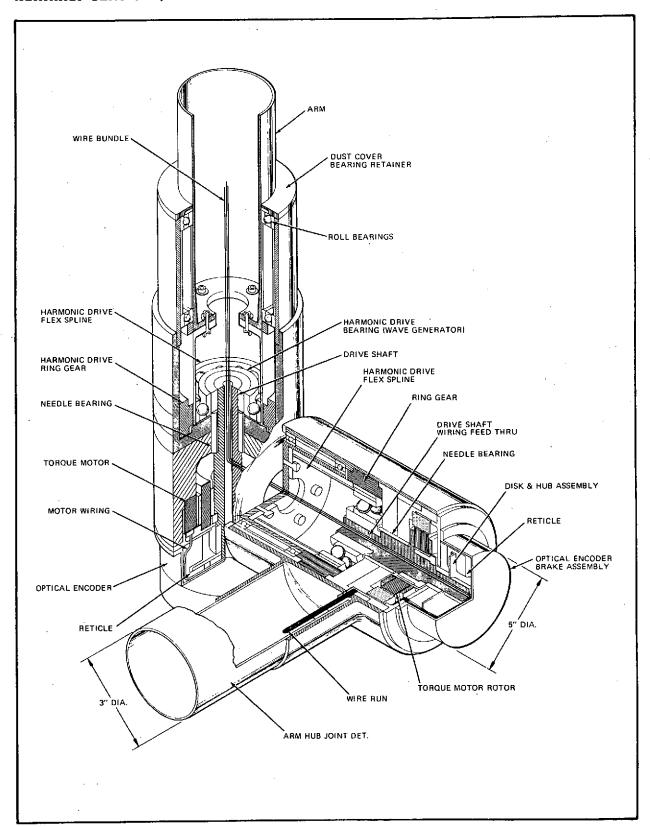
ISOMETRIC CUTAWAY OF MANIPULATOR JOINT
